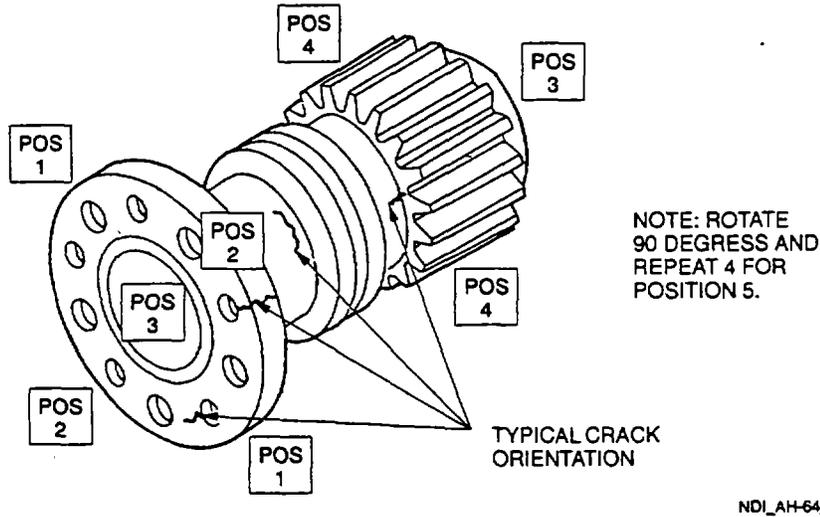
Intermediate Gearbox Flange and Shouldered Shaft
